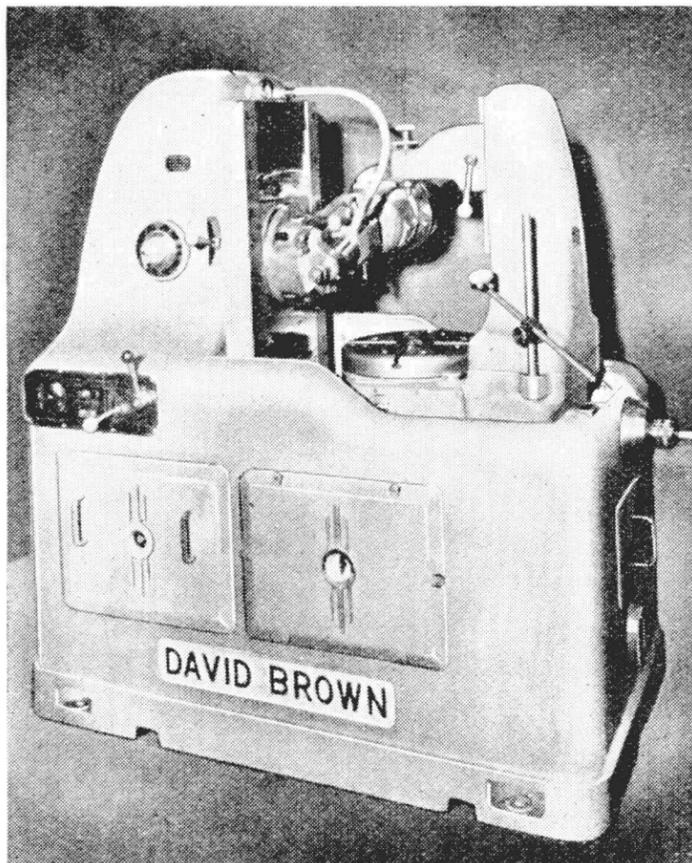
The re-designed David Brown Machine Tools MT15 hobbing machine
